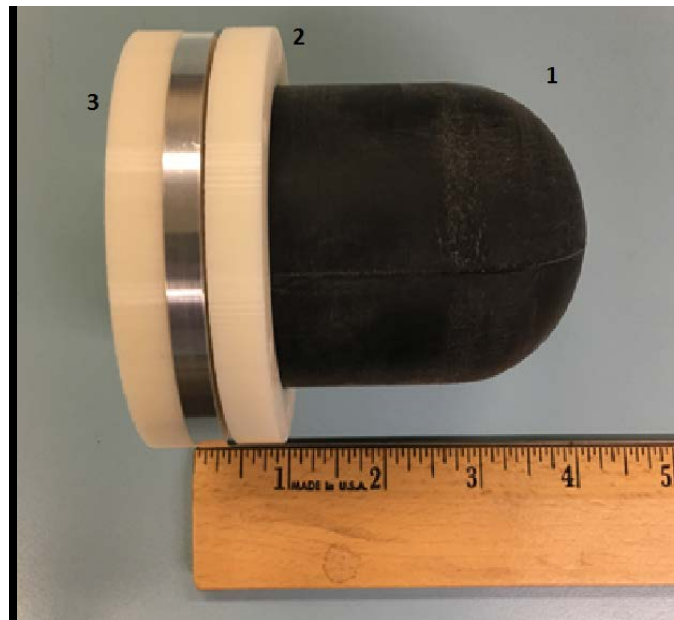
3D Printed PCB Mount and Aluminum Backing Ring.
